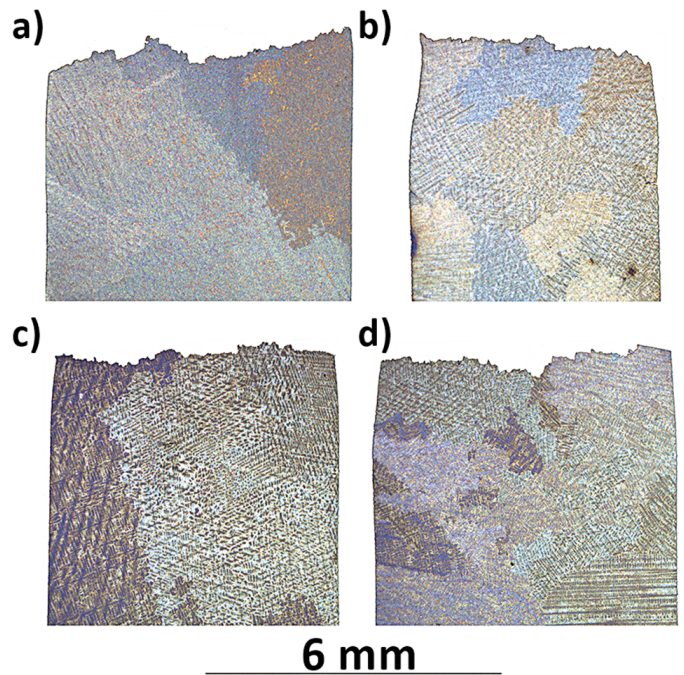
Cross sections of tensile test fractures: a) N1; b) M1; c) N2; d) M2
